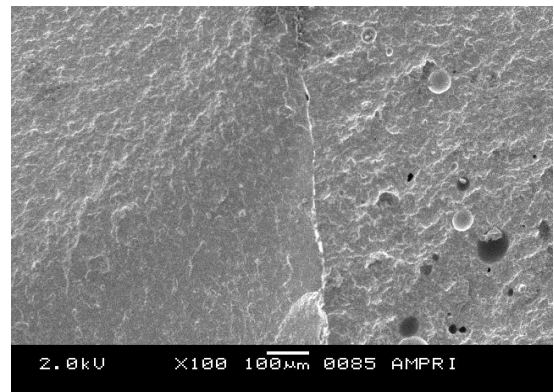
Fracture surface between layer 1 and layer 2
